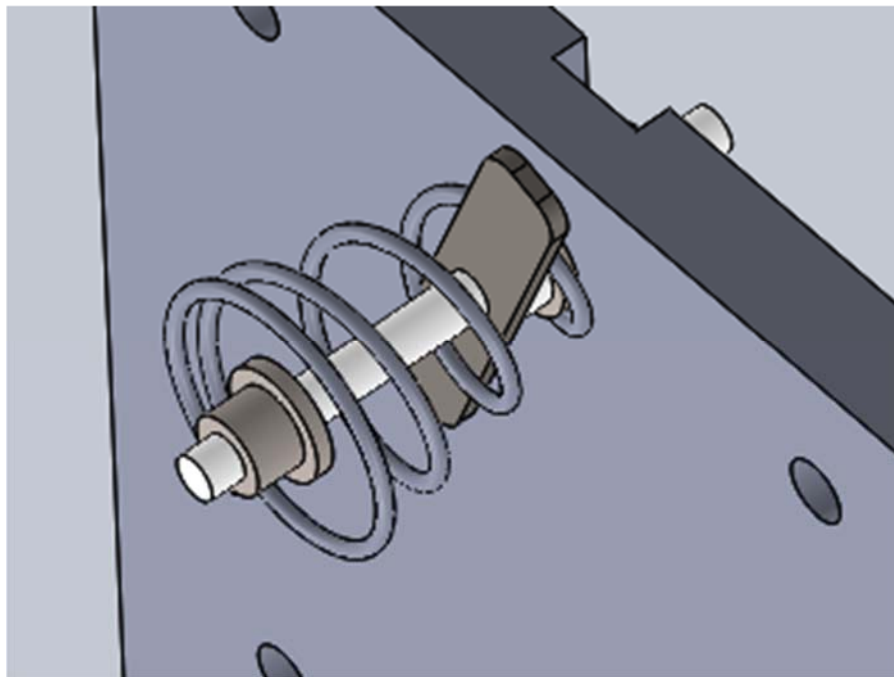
The spring-lever assembly to provide quick, easy changing of spools without having to dismantle the entire assembly.
